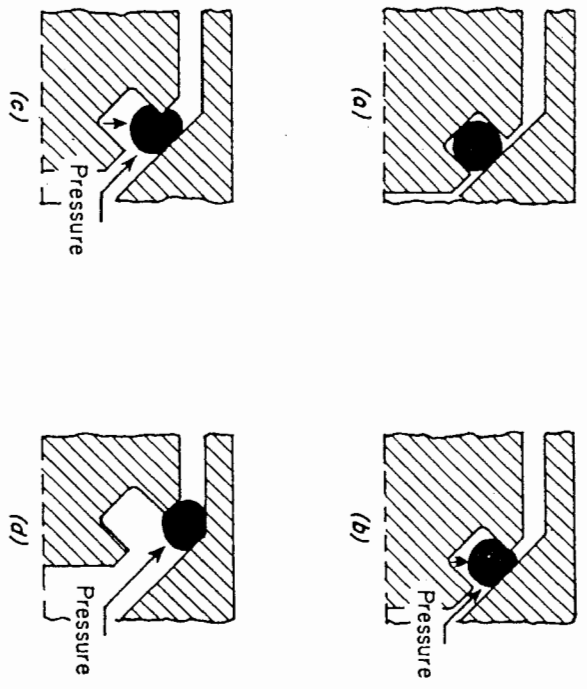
Blowout of O-ring used as a valve seat. As the valve opens, the space between the two faces becomes larger. The pressure acts on the O-ring. The ring continues to seal the opening until it is completely stretched out of the groove.
